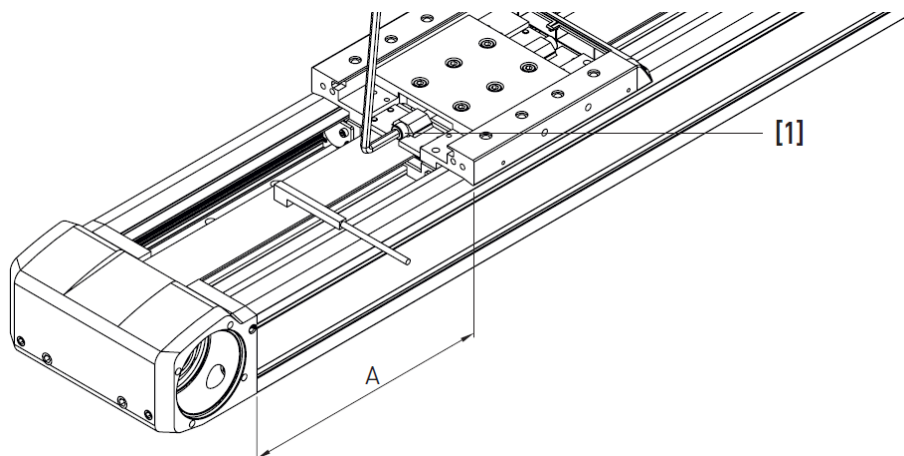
Preloading the toothed belt: Linear tables HT-B with cover strip
